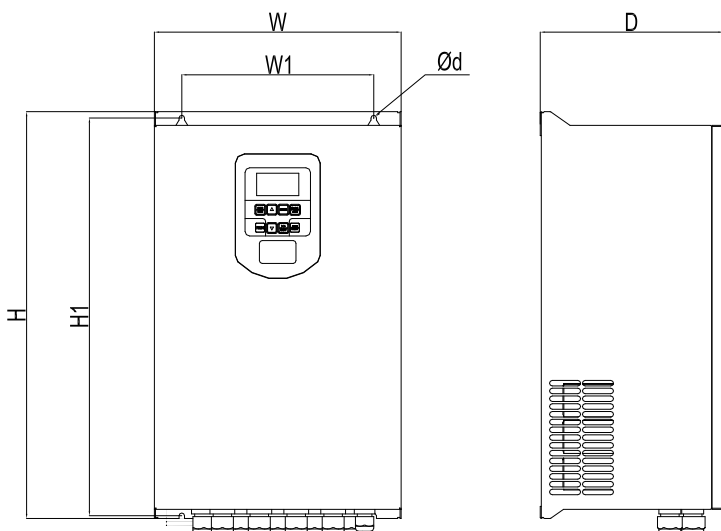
Installation Dimension Diagram and Outline Dimensions of the G630-HP High-Protection Inverter Series
